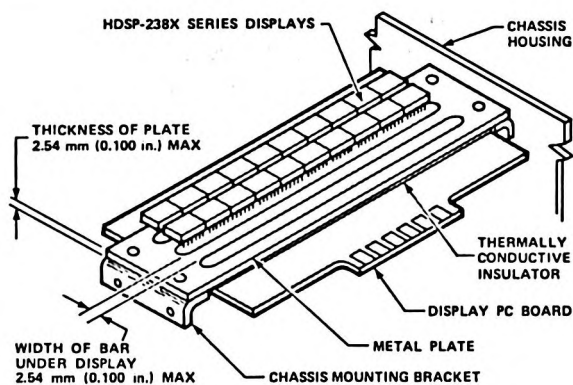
Metal Plate Mounted Between Display Devices and PC Board, Mechanically Fastened to Chassis Housing.
